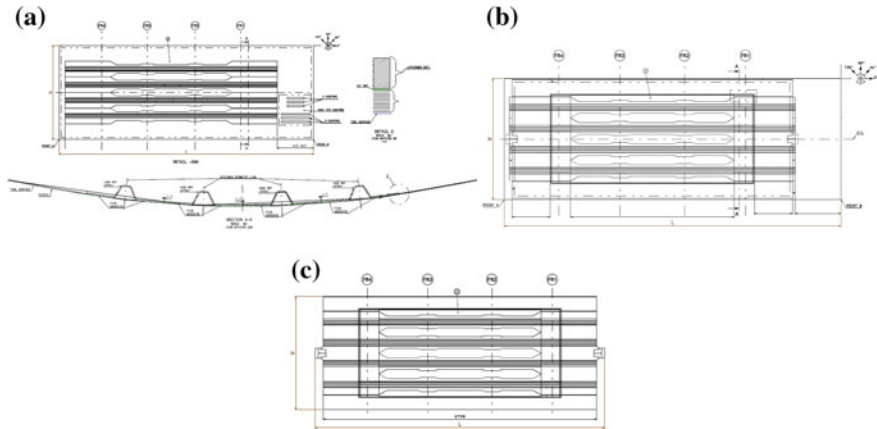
Sample lower panel drawings. a Co-bonding. b Reinforcement application. c Machined part
